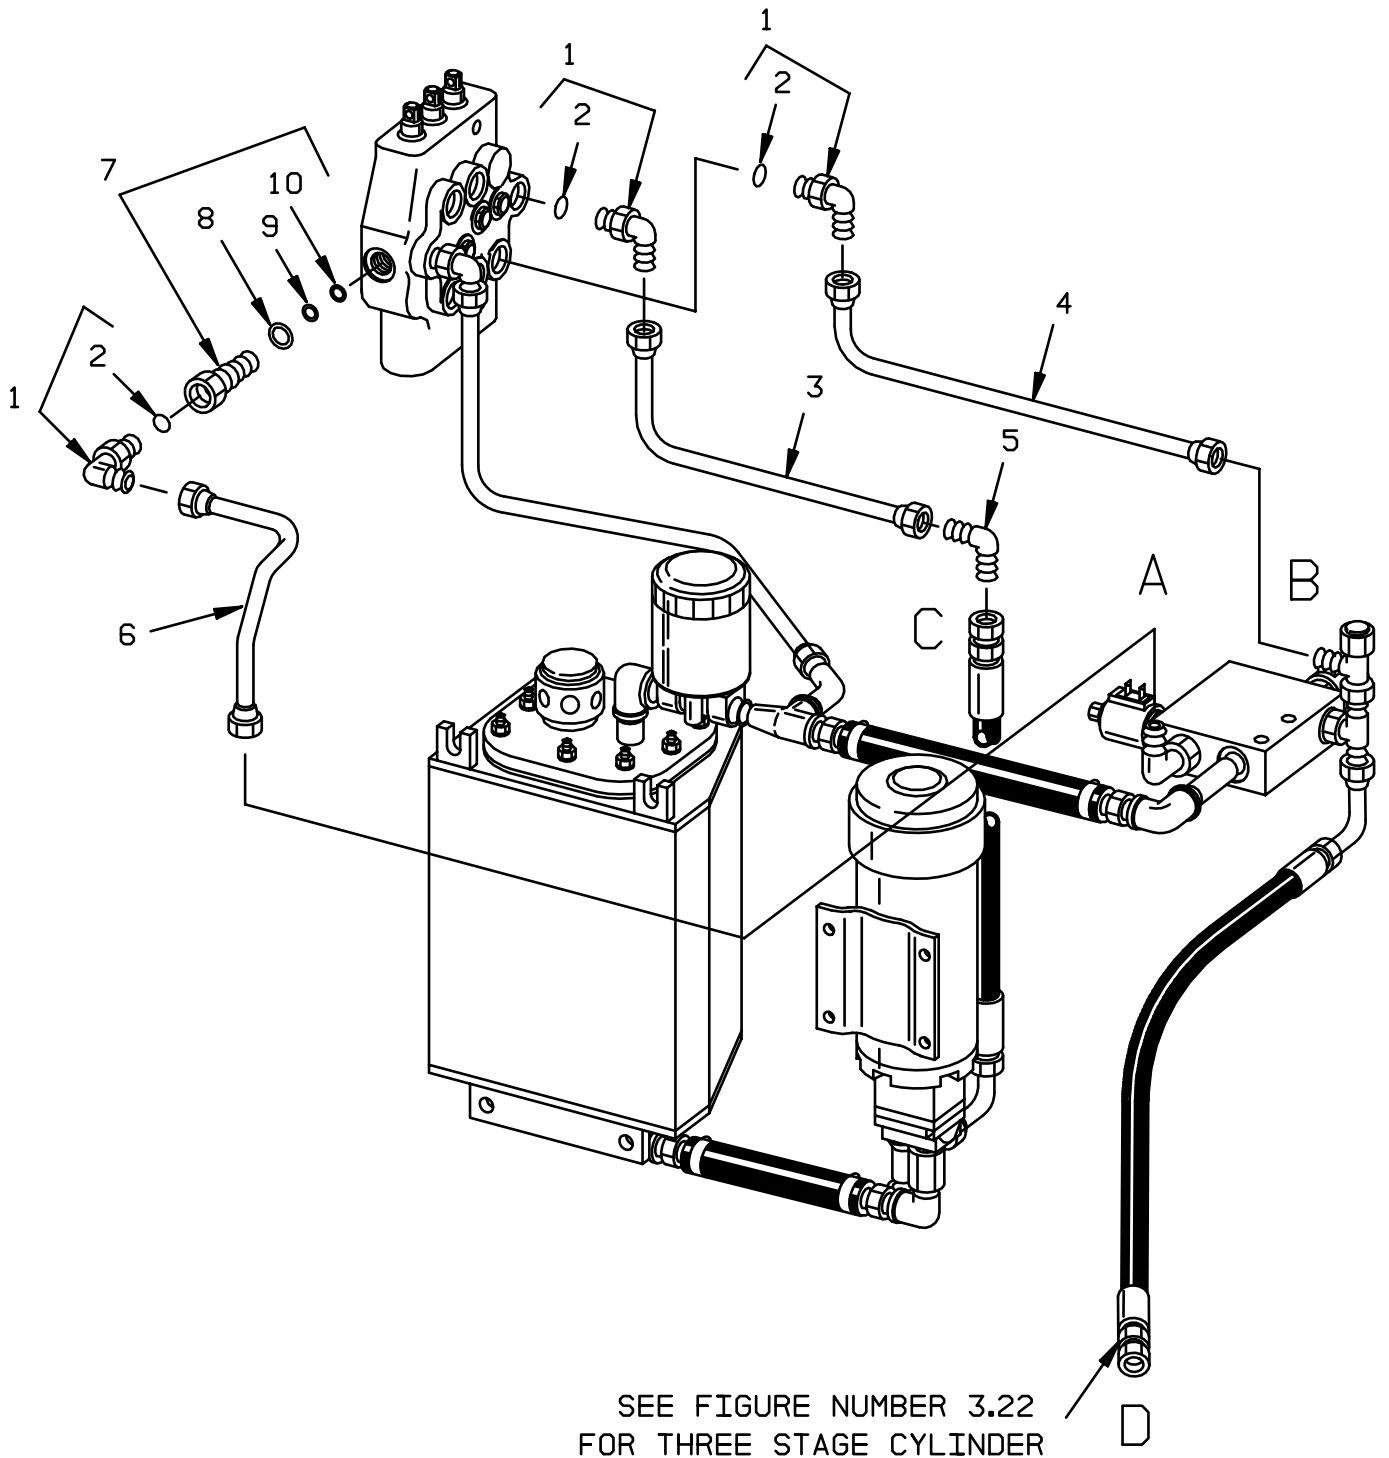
THREE STAGE HYDRAULIC RESERVOIR ASSEMBLY
